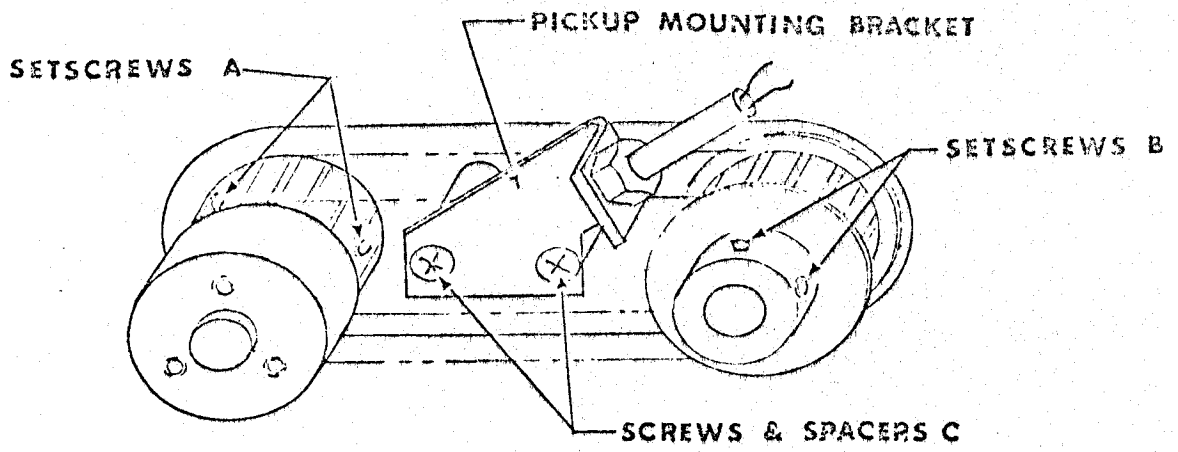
, READ STATION AND PICKER ROLLER, BOTTOM VIEW WITH PROTECTIVE COVER REMOVED
